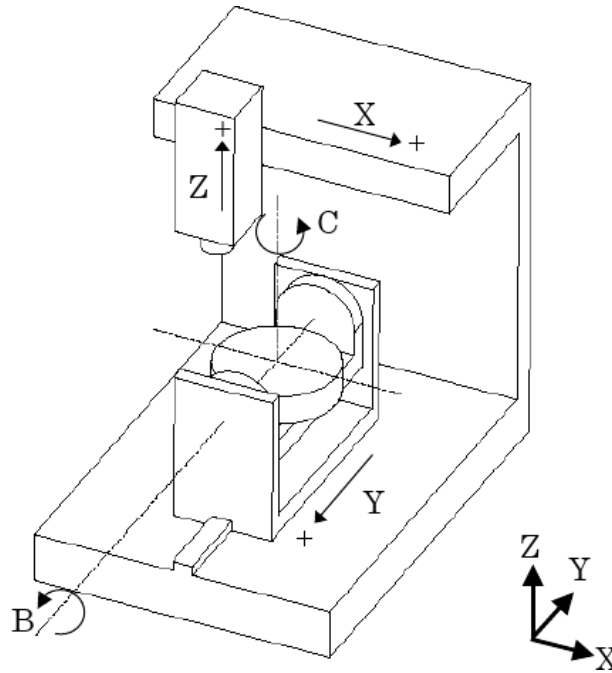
The configuration of a five-axis machine tool considered in this paper.
